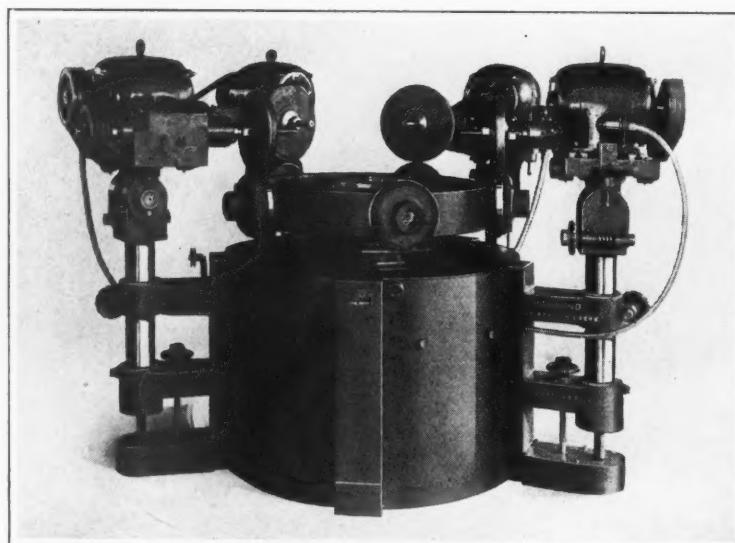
Hammond Automatic Polishing and Buffing Machine Set up for Work Rotated on a Horizontal Axis
